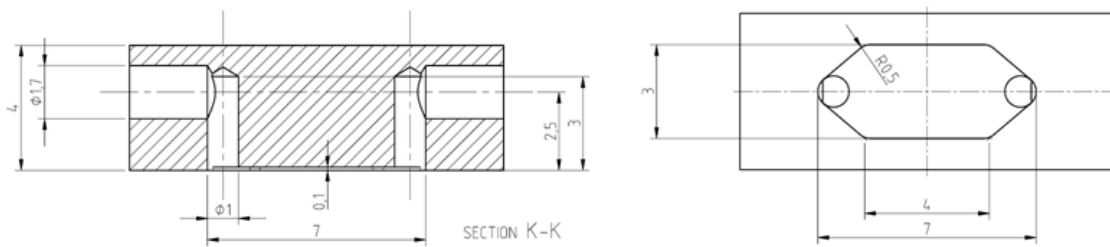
CAD model of the flowcell. (Left) Side view. (Right) Bottom view. The angled corners in the channel are to prevent fluid from getting trapped as would happen in the corners if the channel were to be rectangular.
